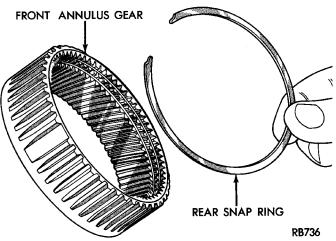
Front Annulus Gear Support Snap Ring LOW/REVERSE (REAR) SERVO-RECONDITION DISASSEMBLY
